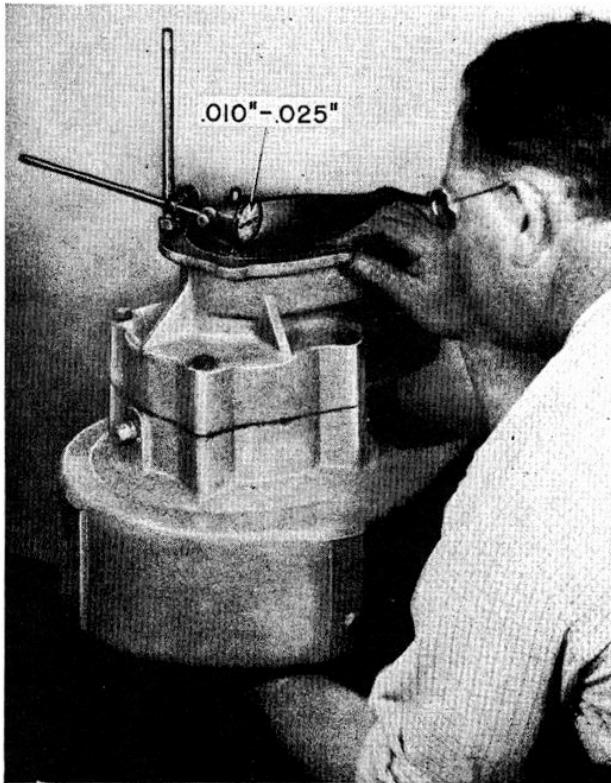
MEASURING CRANKSHAFT END-PLAY
